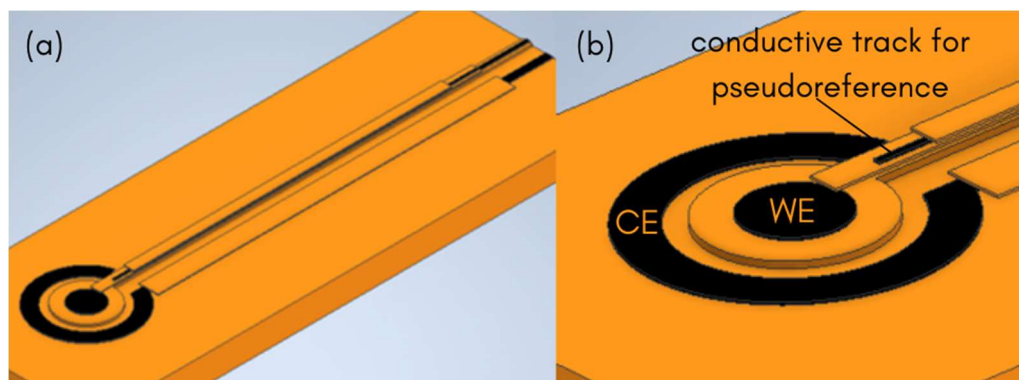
CAD mock-up of (a) staircase electrode assembly (b) electrode configuration
